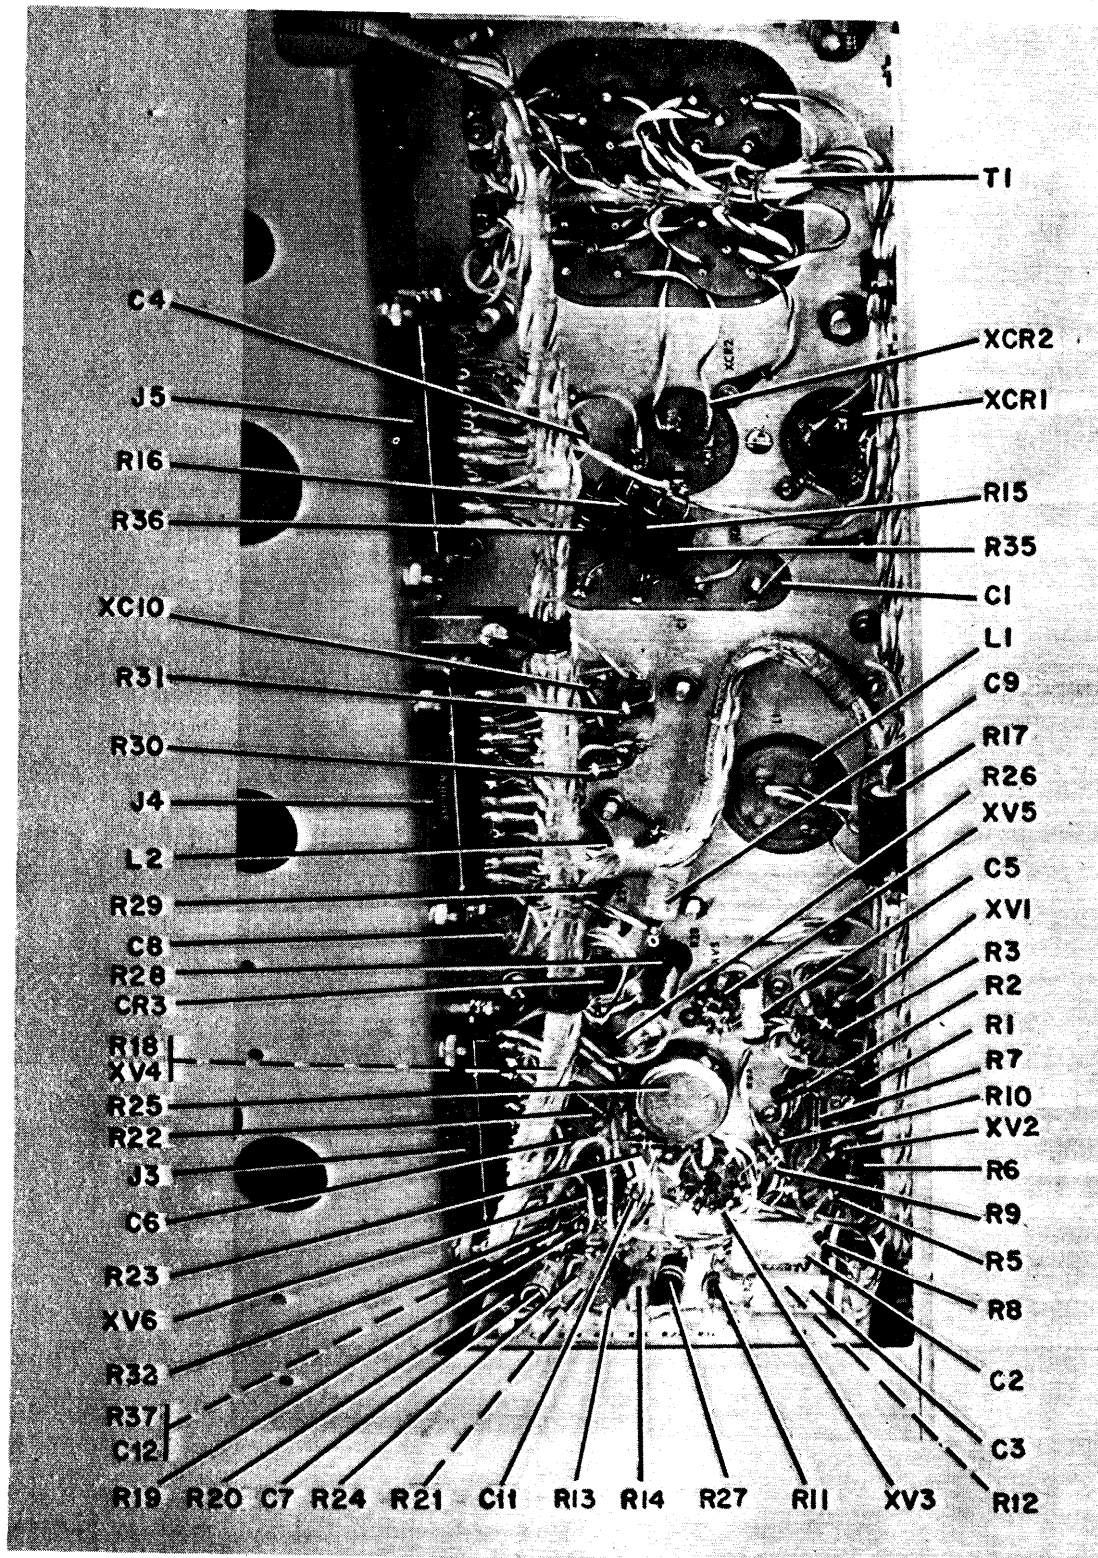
TS-1253A/UP, Front View, Parts Location
